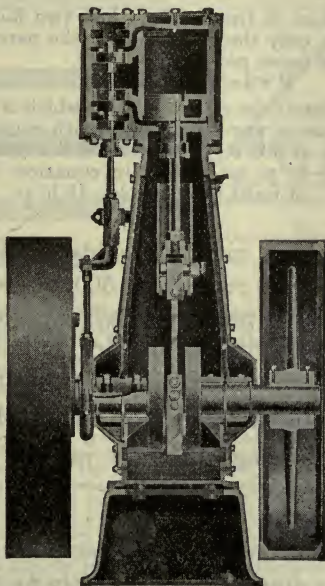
View of Buffalo small vertical piston valve stationary engine. The main bearings are ring oiling and receive their supply of lubrication from the bed by the rotation of the crank disk; they are carried on a heavy plate bolted to the frame. Removable heads surmounting them shut out all the dust and grit and allow of ready access for adjustment. A false head forms a chamber to prevent condensation getting into the engine bed. This is a so called "square" engine, that is the stroke is the same length as the piston diameter. The 5 × 5 size at 475 r. p. m. is rated at 12 horse power, and the 6 × 6 at 450 r. p. m., 18 horse power. Compare these ratings with the 5 × 6 engine given in the example on page 82.
